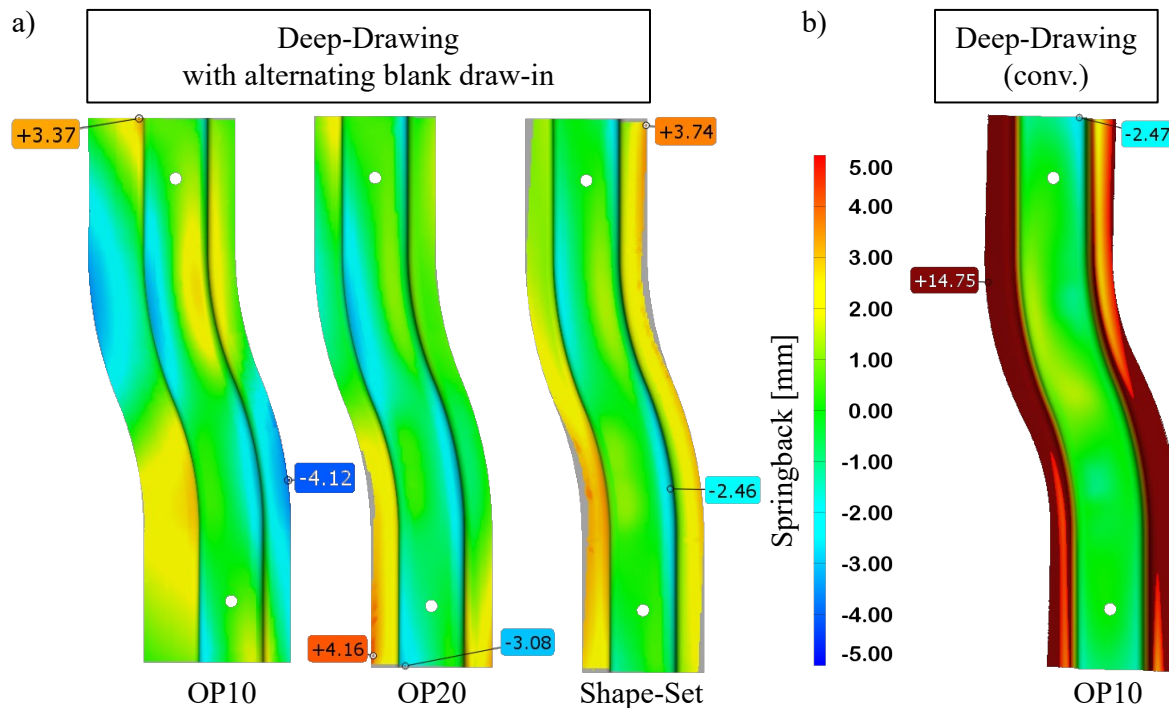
Measured shape deviations for springback S-Rail geometry for experiments with a) deep-drawing with alternating blank draw-in and b) conventional deep-drawing
